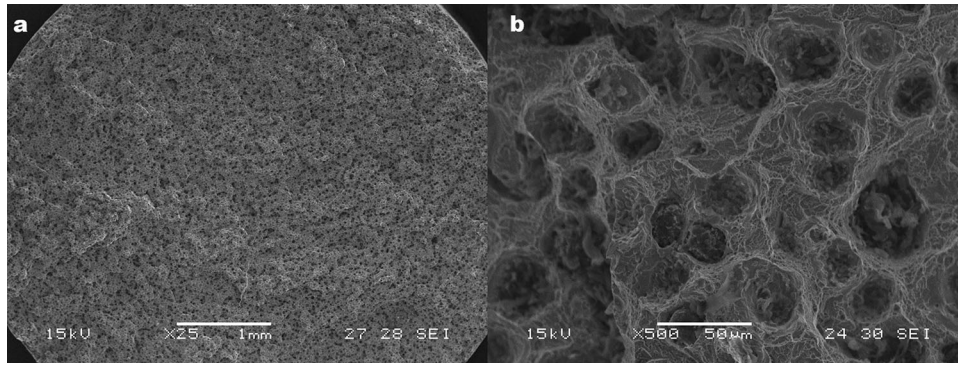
Fracture surface of an ADI sample tested in dry condition
